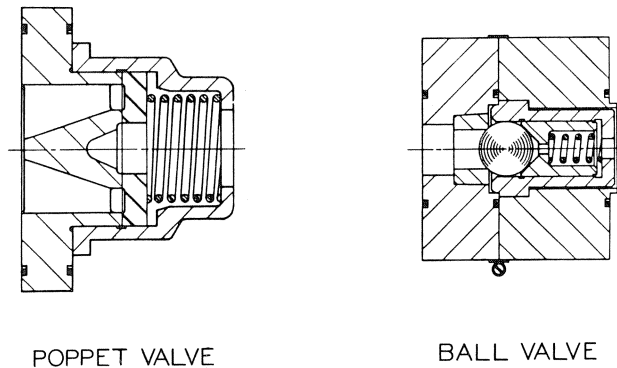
Sectional View of a Typical Poppet Valve and Ball Valve.
